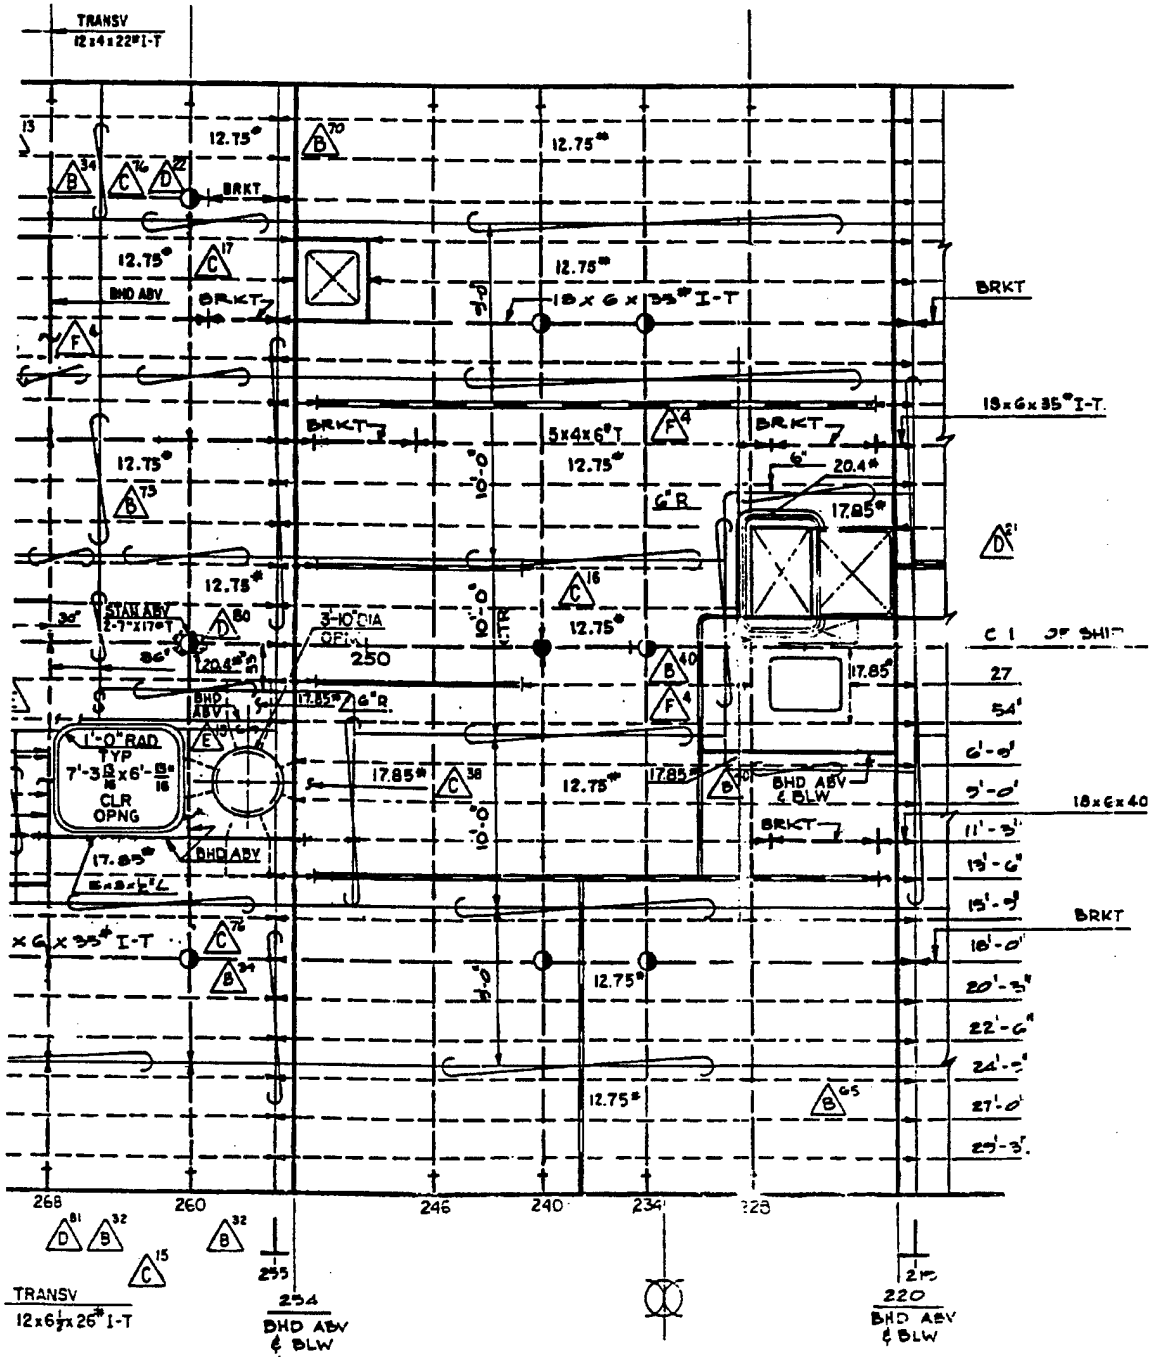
Structural Scantling Plan Frame 246 to Frame 220, NAVSEA Drawing 100-621884
